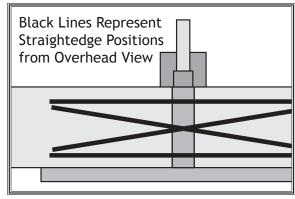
Straightedge positions for checking infeed/outfeed table parallelism.
